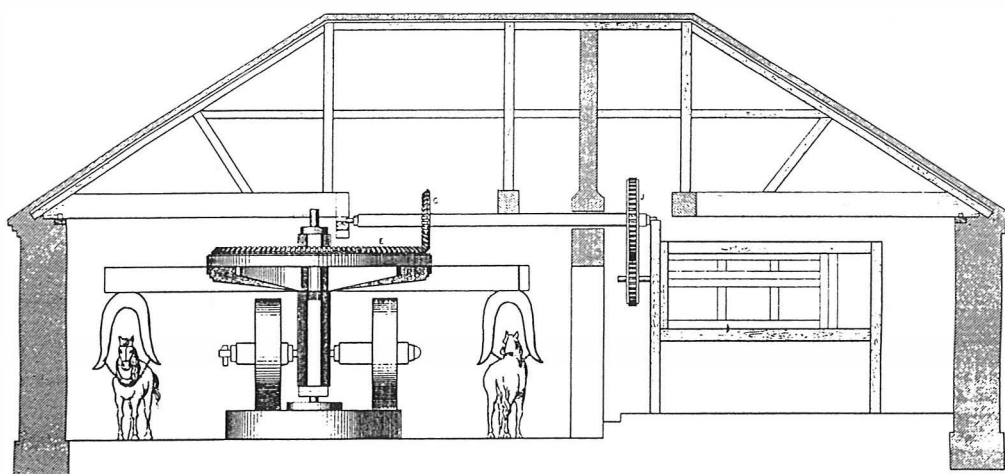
Section of a charcoal or sulphur mill erected at the Madras powder mill in 1853. The equipment at the right is a reel and the runners are about 5 ft in diameter.
